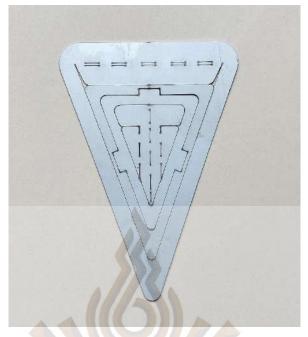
Initial protype in Zinc coated aluminium sheets
